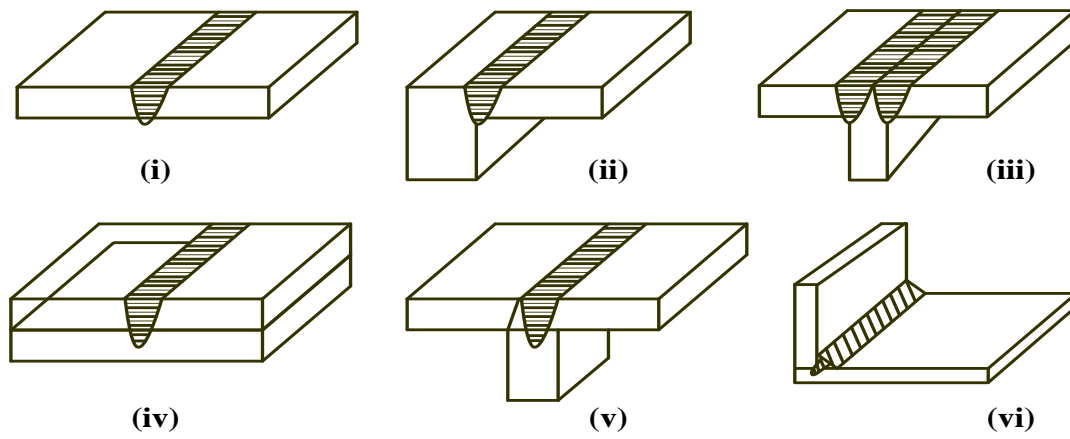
Various FSW joint types (i, ii) Square butt and lap joint, (iii) Edge joint, (iv, v) Square and butt T-joint, and (vi) Fillet joint.
